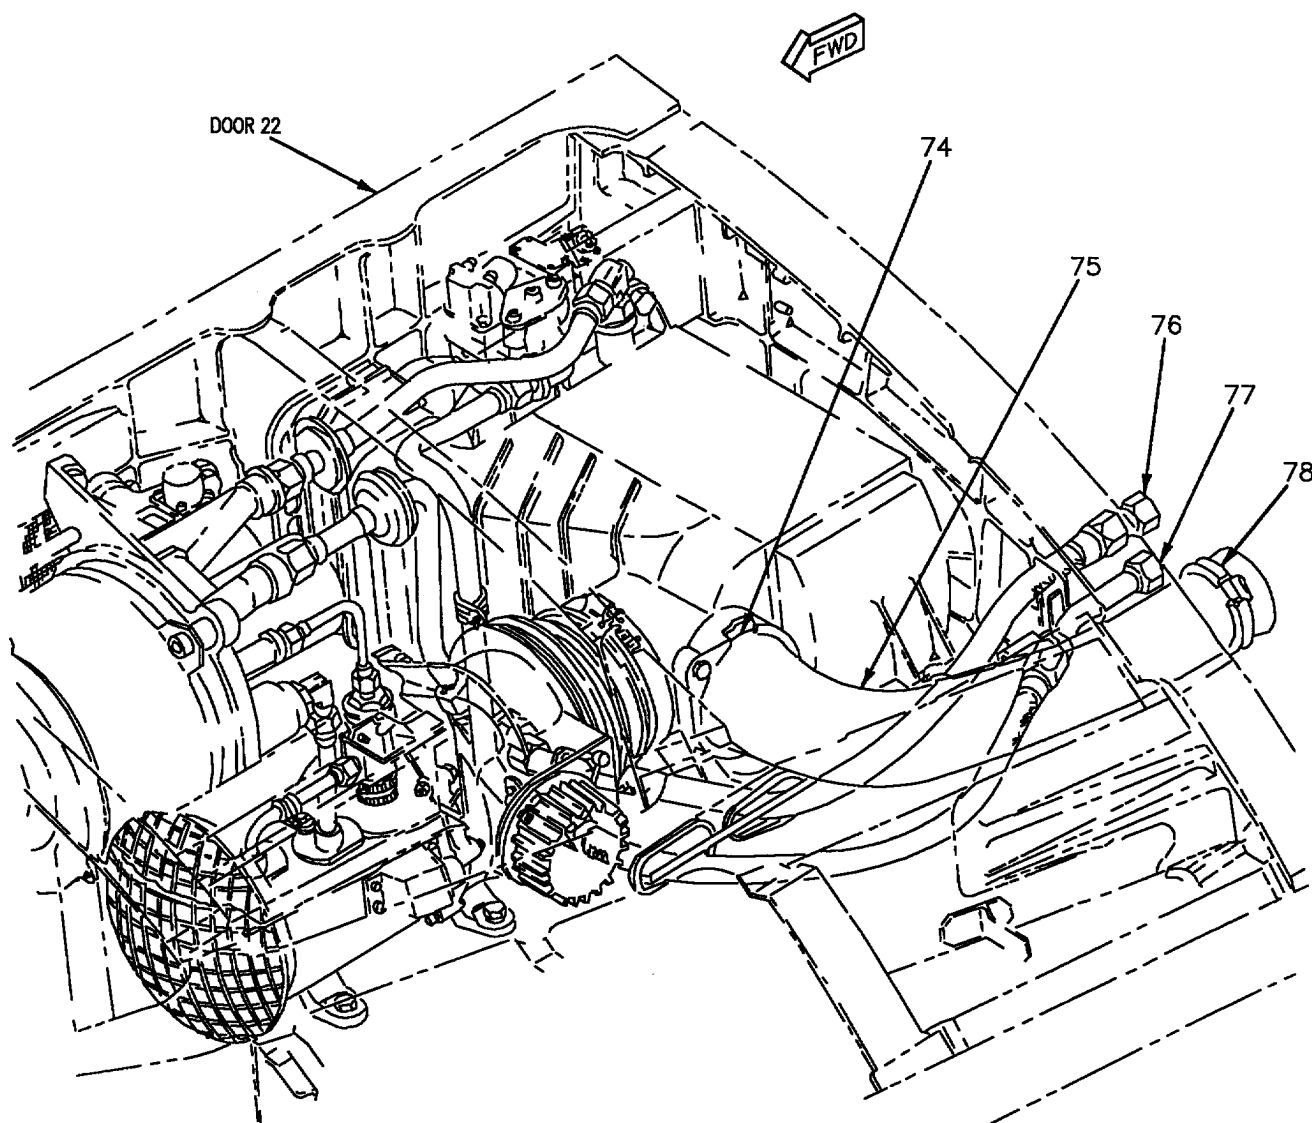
Leading Edge Extension Removal and Installation (Sheet 7)
